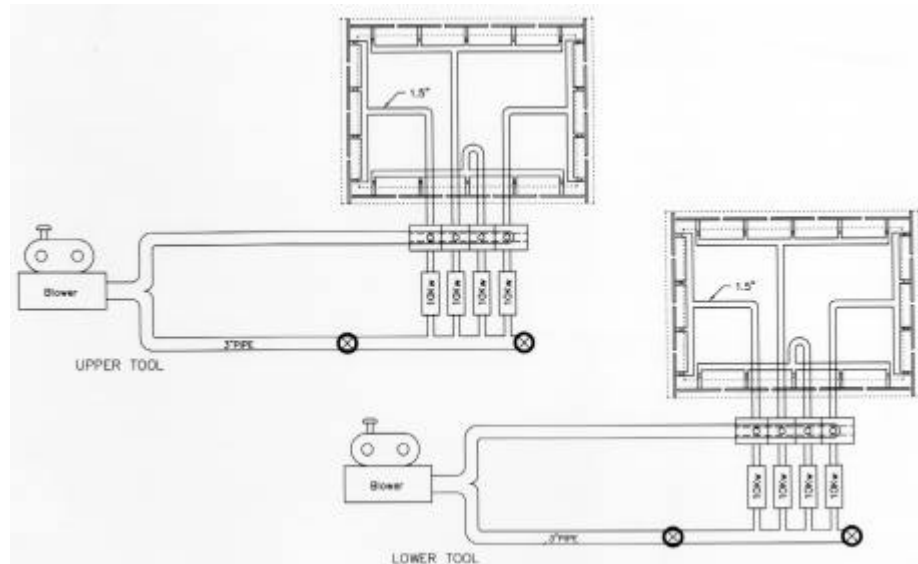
Schematic Drawing of a Hot-Air-Impingement Fixture (Front Hood) [11]
